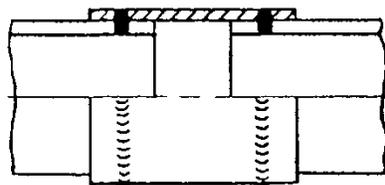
DOUBLE MELT THROUGH WELD JOINT
